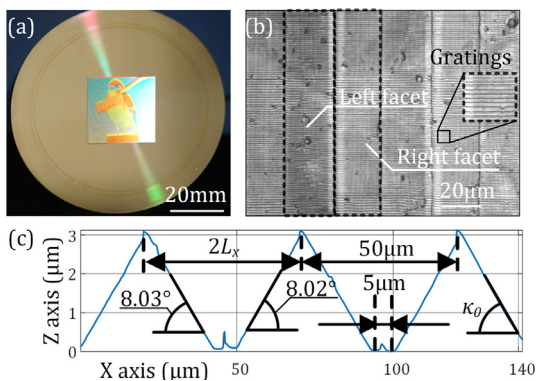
(a) Machined workpiece; (b) microscope image of the machined surface; and (c) measured V-groove surface profile.
